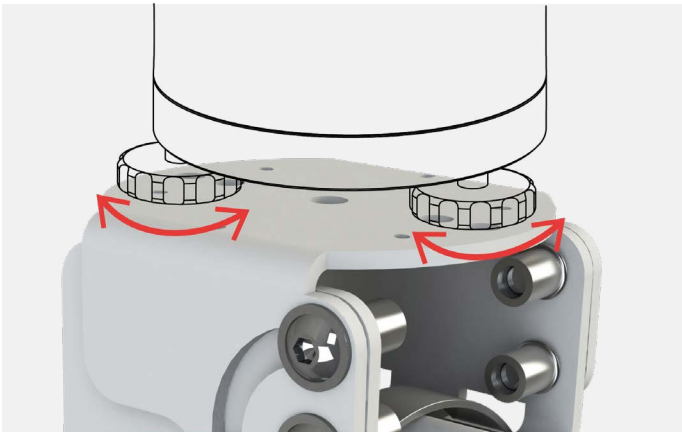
Installation of PMF01 on a horizontal crossarm, step 5.
